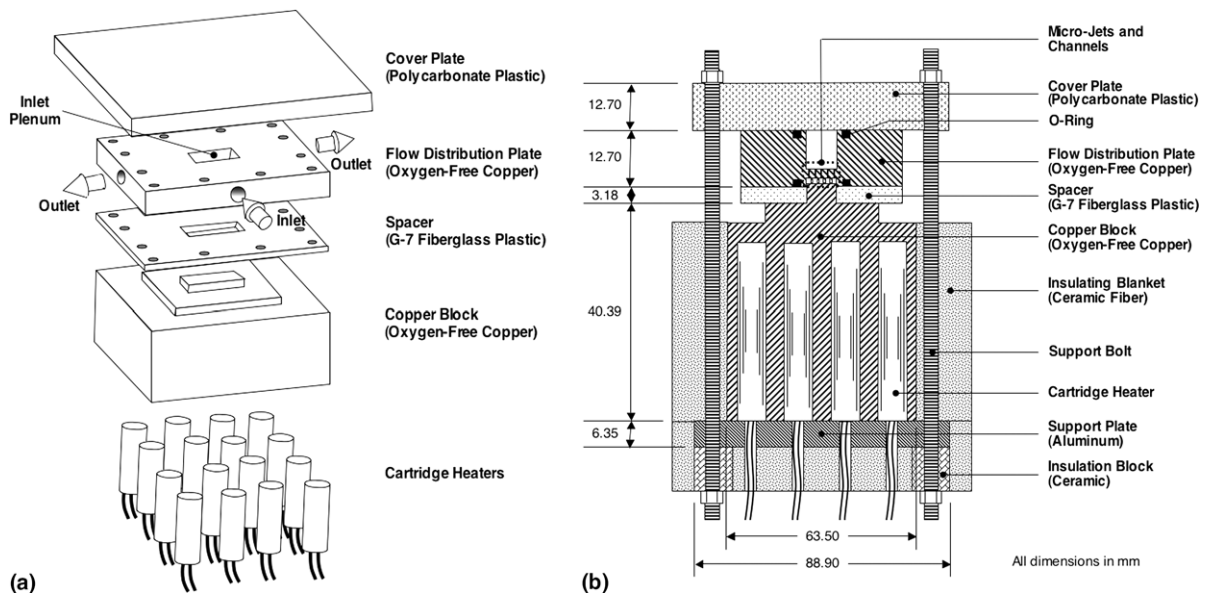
(a) Test module construction. (b) Cross-section of module assembly.
